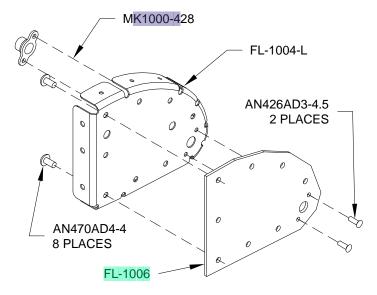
OUTBOARD ROD END RIB SUBASSEMBLY
